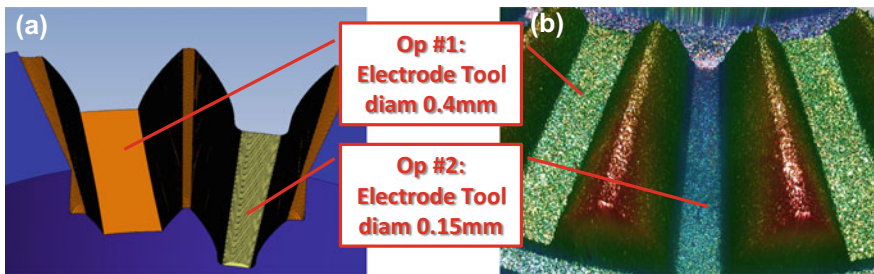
Two operations with two machining parameters and electrode tool size have been adopted for machining the teeth: a simulation, b confocal acquisition of the machined cavities Straight Bevel micro-gear
